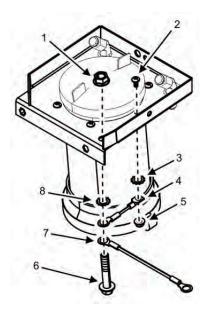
Fuel Tank Filler Neck Ground Cable — Removal.
